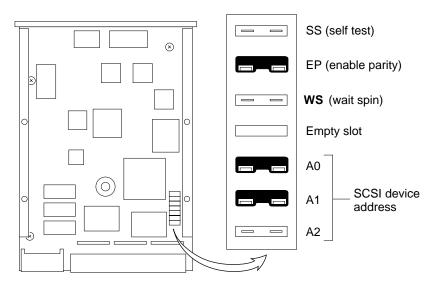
Jumper Settings for Hard Drives with Six Jumpers (settings labeled)
